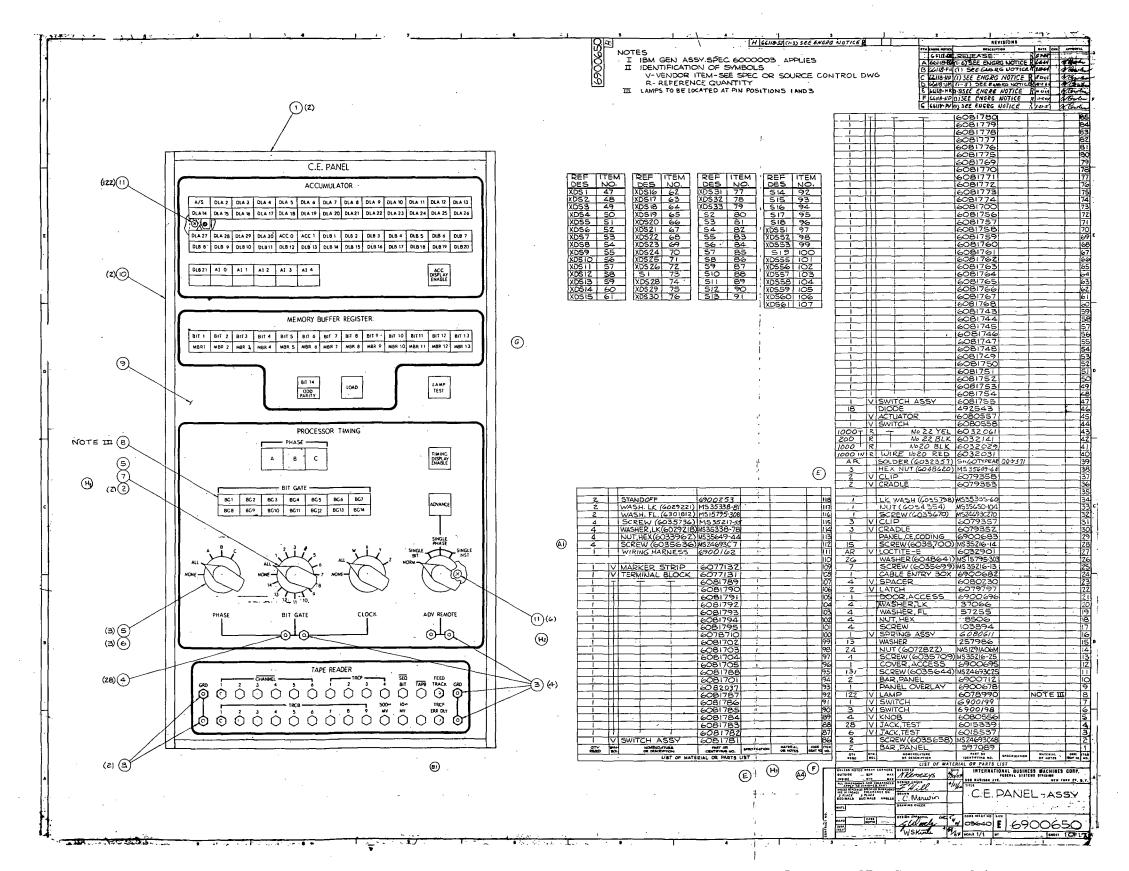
C. E. Panel Assembly (03A4) Assembly Drawing (Sheet 1 of 2)
